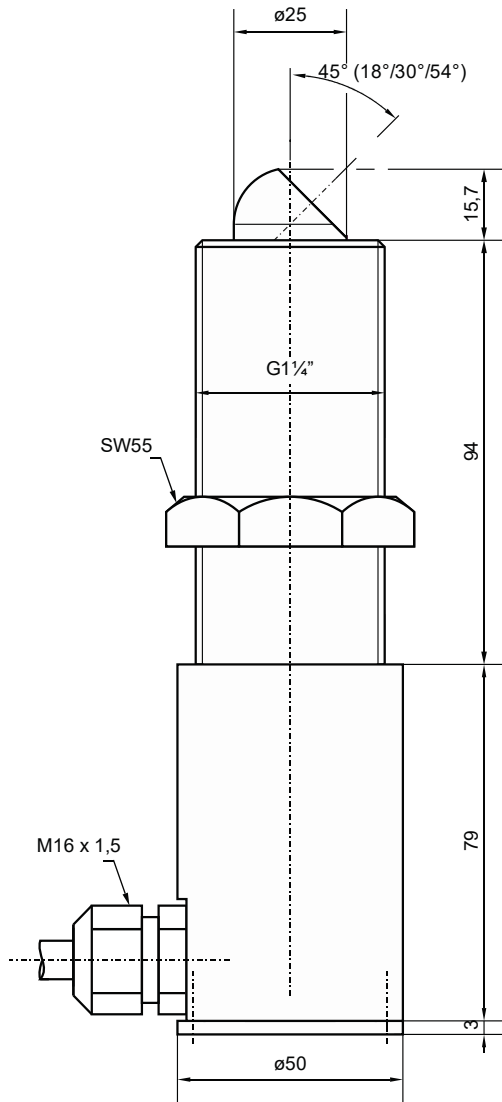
Dimensions screw-in sensor type NOS-V2E00
